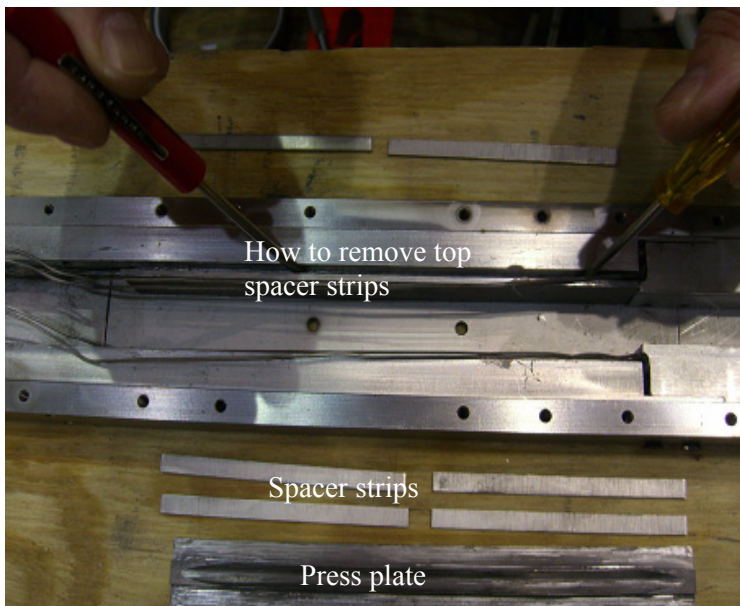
(c) Top spacer strips are removed using tweezers and small screwdriver. The bottom spacers are easily removed once the pressing plate is carefully moved from its position.
